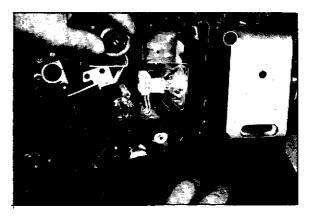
WINDING TAKE-UP SPROCKET SPRING
